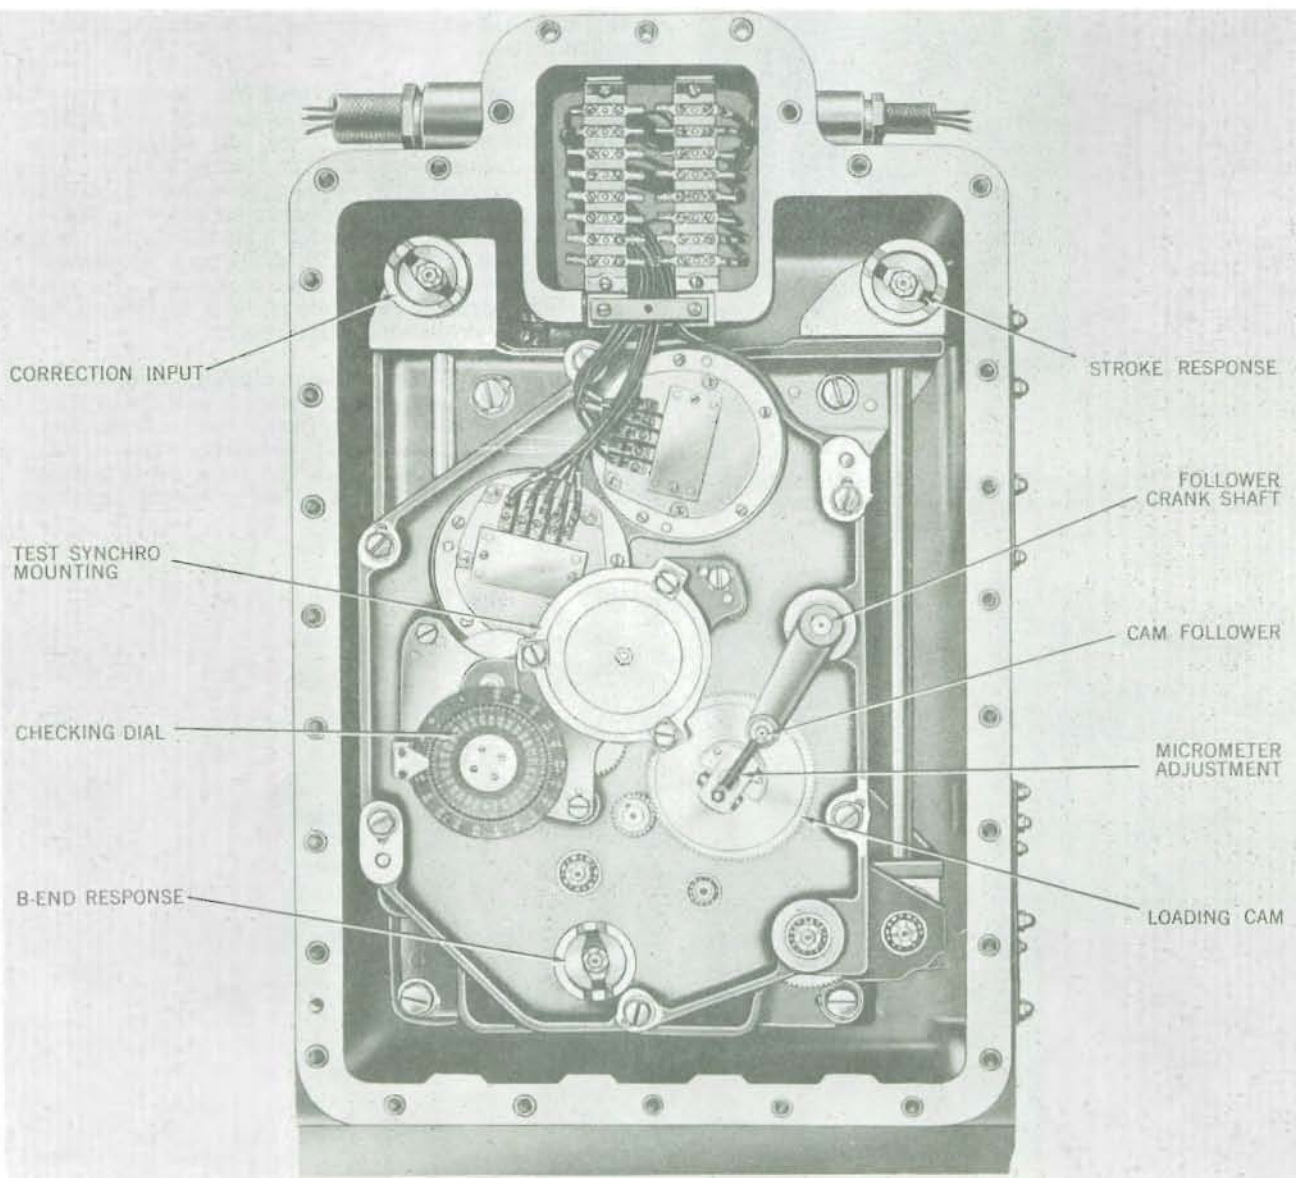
Elevation Receiver -Regulator Mk 10 Mod 0, Rear View - Back Plate Removed
